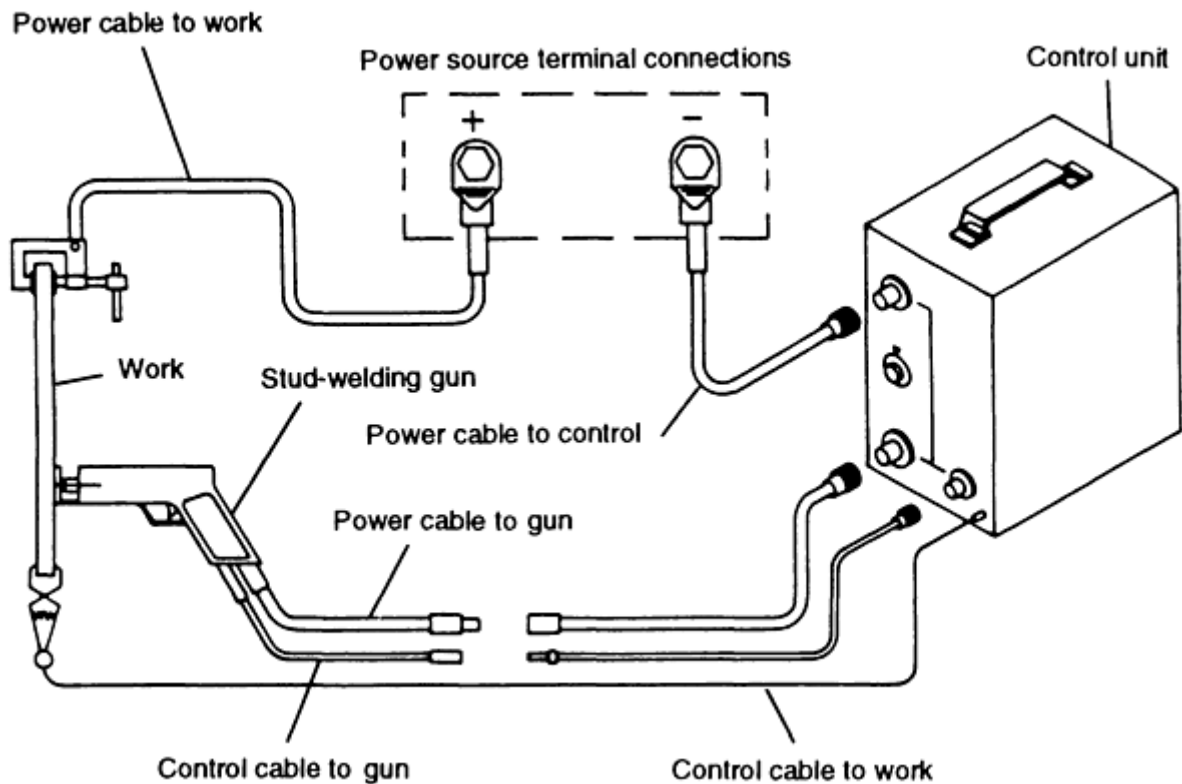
STUD ARC WELDING CONTROL SYSTEM. THE CONTROL SYSTEM MUST BE CONNECTED TO A DC POWER SOURCE FOR WELDING. IN MOST APPLICATIONS, THE STUD (ELECTRODE) SHOULD BE NEGATIVE.
